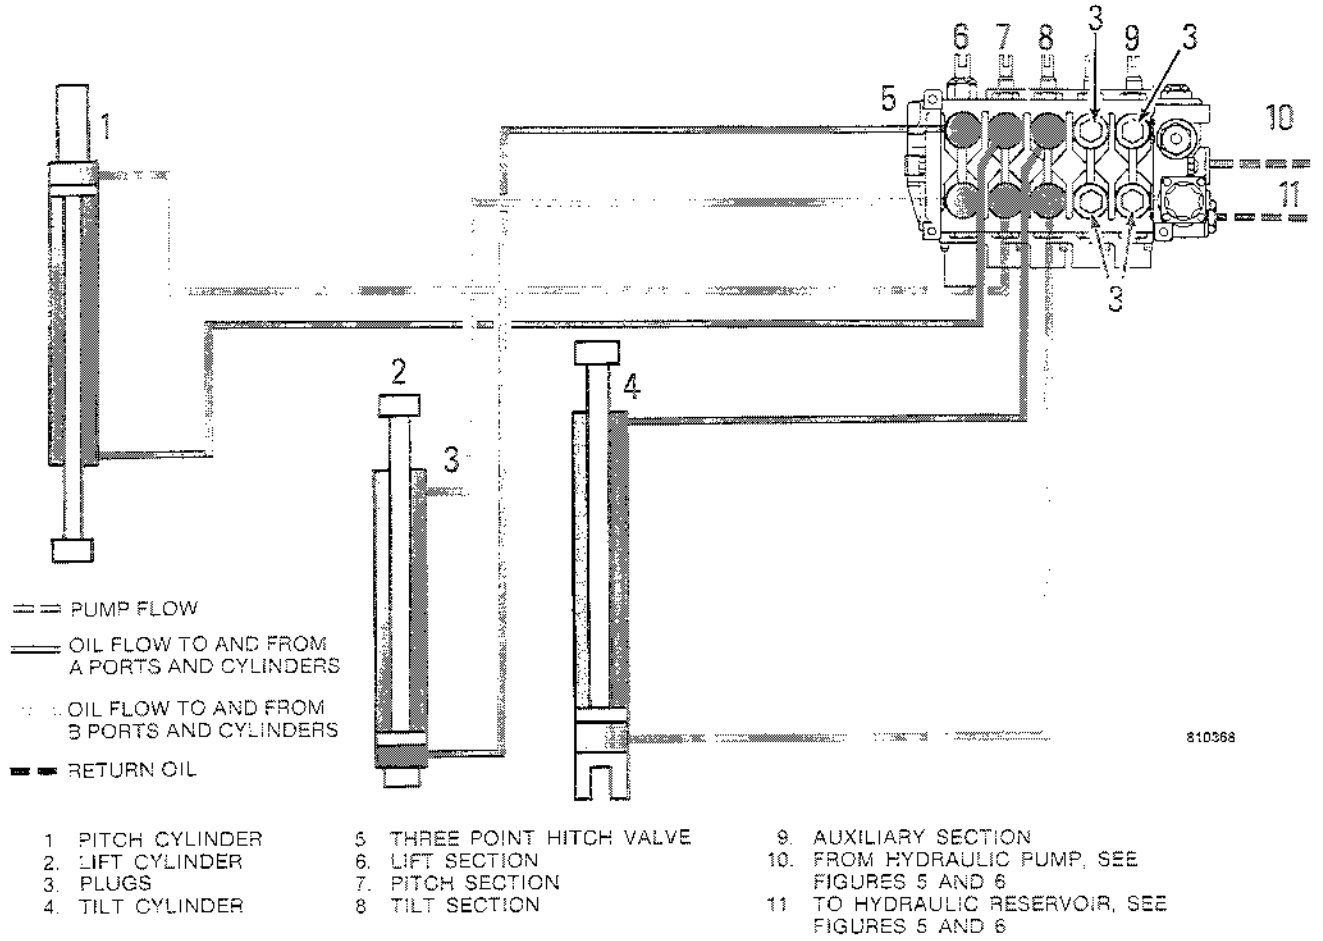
Three Point Hitch used on Loader/Landscaper Machines
